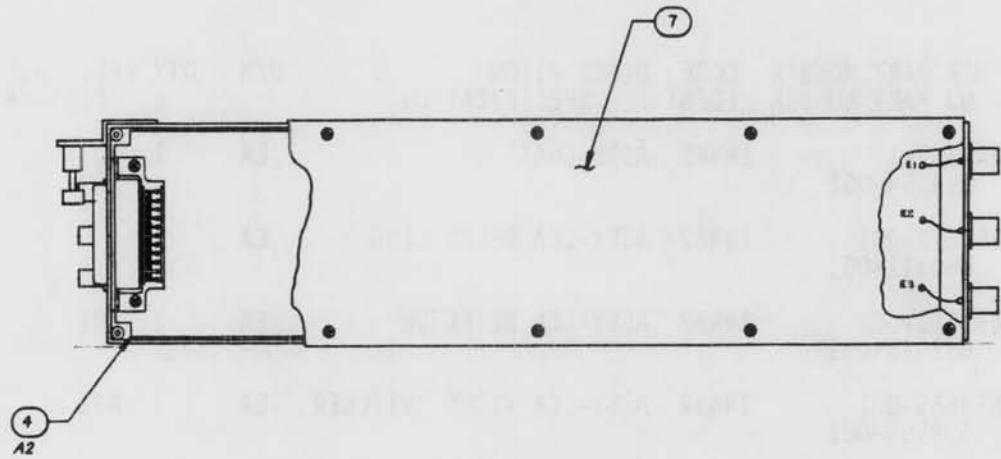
Demodulator A11 Parts List, Part No. 659552 (Sheet 1 of 3)
